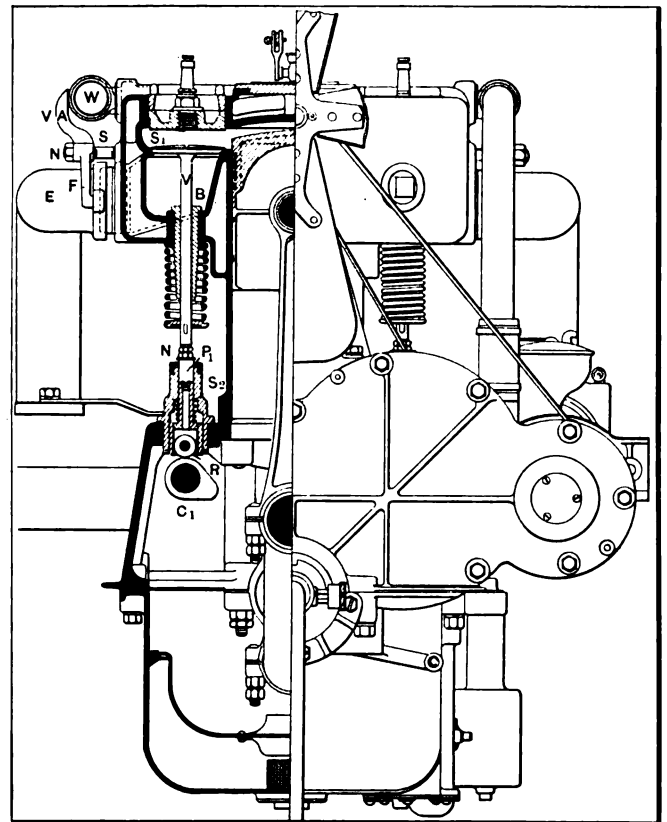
Front transverse section through an engine cylinder and part of the base-chamber
